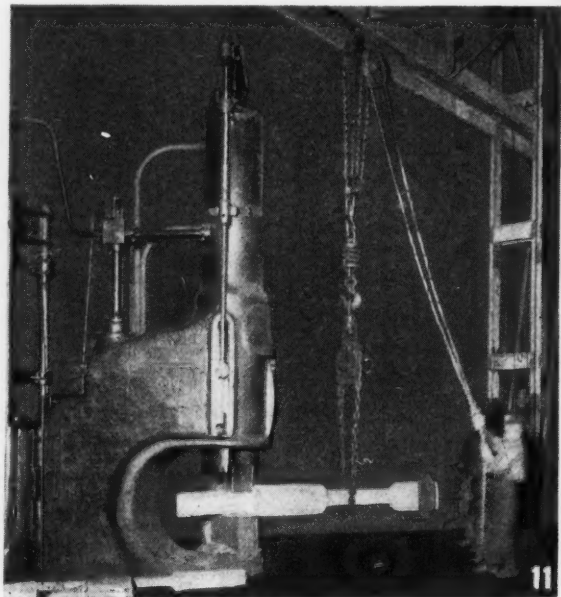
This modern forging press has many advantages over the steam hammer. Three drawbars are forged from this billet.
